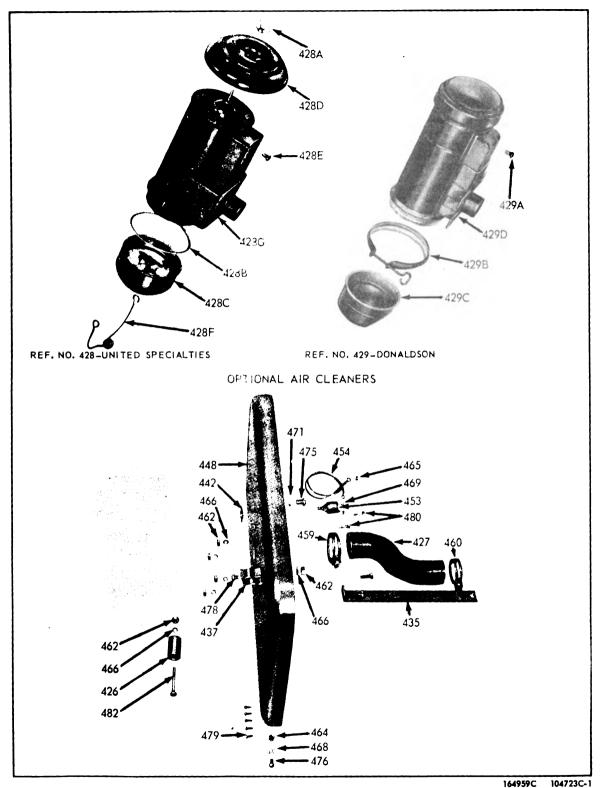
, END PANEL AND AIR CLEANER FOR ENGINE HOUSE WITH FUEL TANK AT TAKE-OFF END
